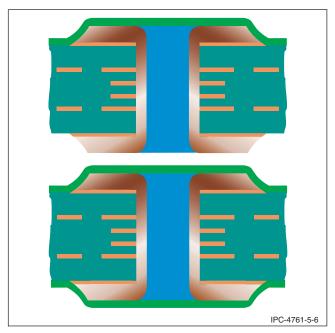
Examples of Type VI Filled and Covered Vias, Dry Film Cover
